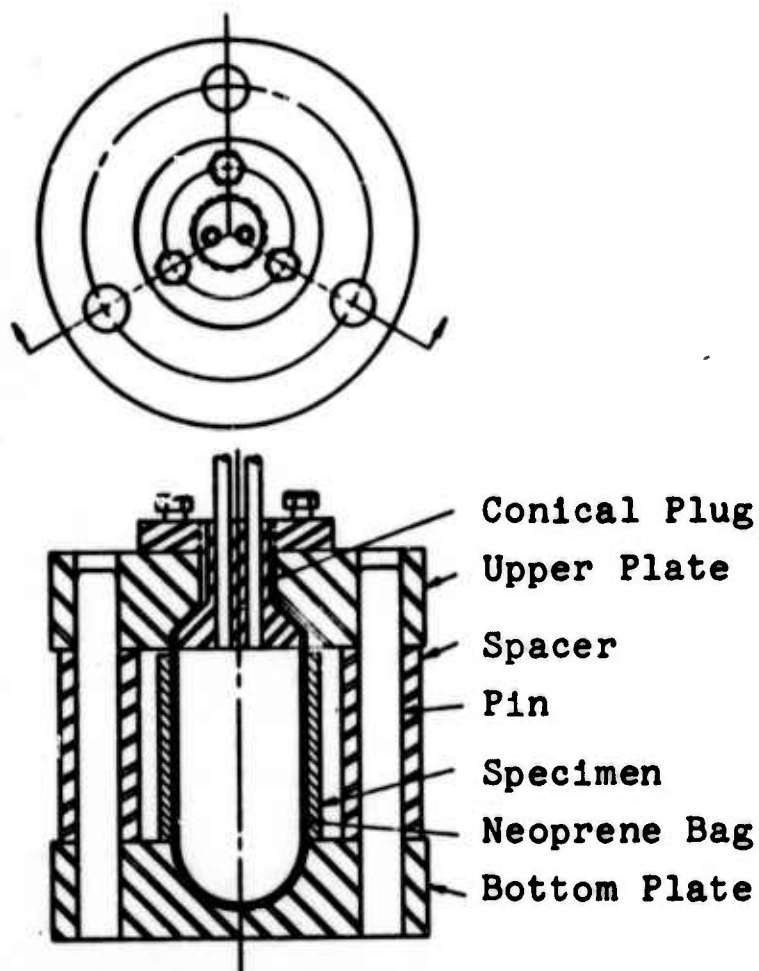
Specimen and Test Fixture for Hoop Tensile Stress Testing.
